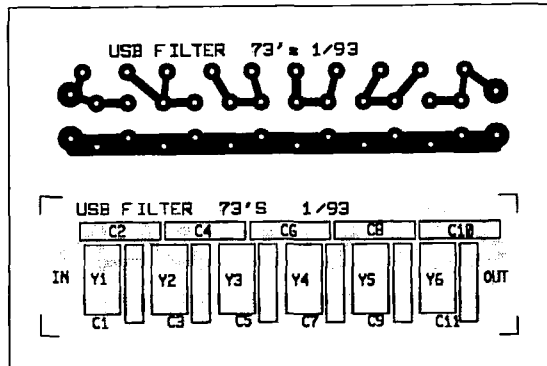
(a). PC board foil pattern for the upper sideband filter. (b). Parts placement diagram.
